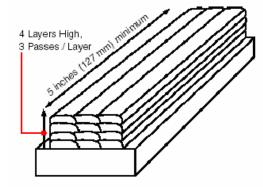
Weld metal pad for chemical analysis (ASME SFA-5.17)
